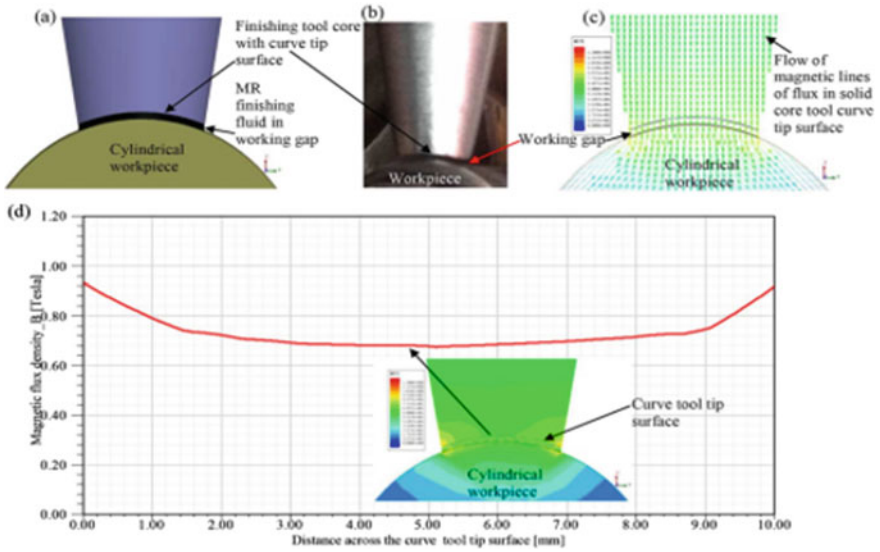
Material removal mechanism of MR finishing of the cylindrical workpiece surface [18]
